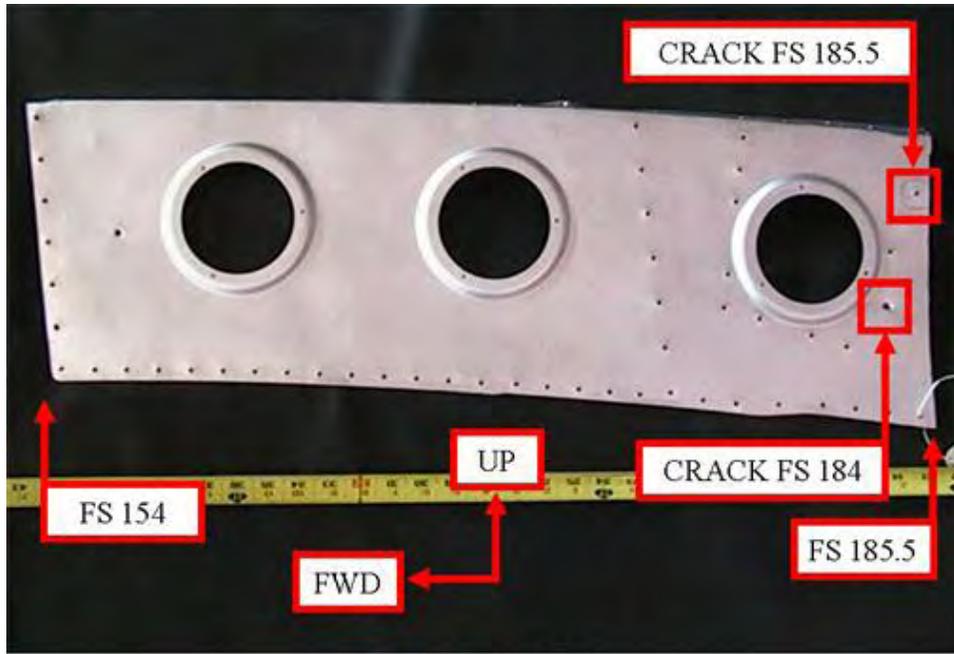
Overview of Left Wing Rear Spar Bulkhead Assembly WS 87.5 FS 161
